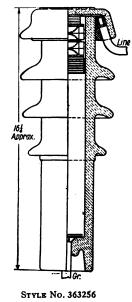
Section of Autovalve Arresters Showing Internal Construction
